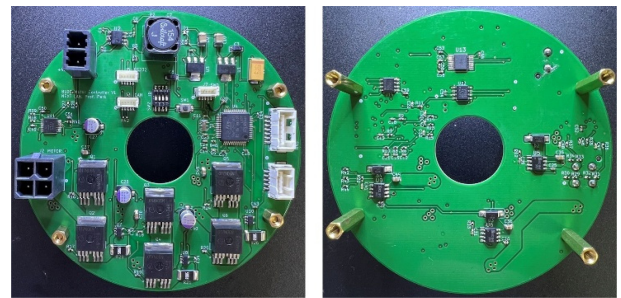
A top and bottom view of a prototype of a BLDC motor controller
